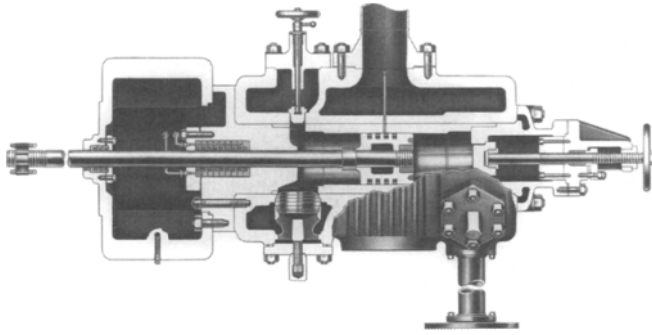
M. For low compression ratios, designed for 1,000 psi discharge pressure equipped with hand-operated crank and head-end fixed clearance pockets for capacity control. Air-cooled, cast semi-steel, double-acting. (Used by permission: Dresser-Rand Company.)
